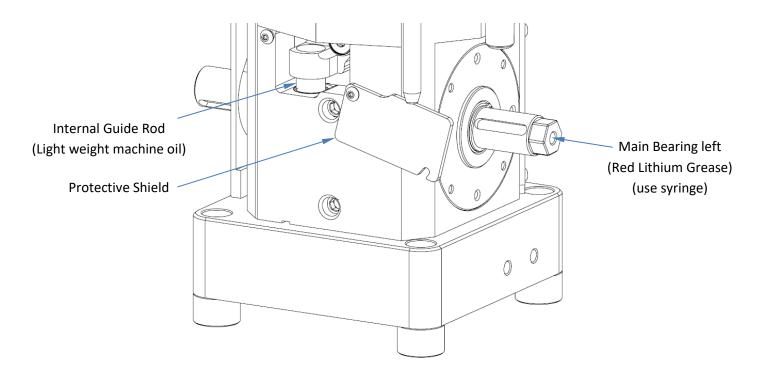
Main Bearing left and Internal Guide Rod lubrication points
